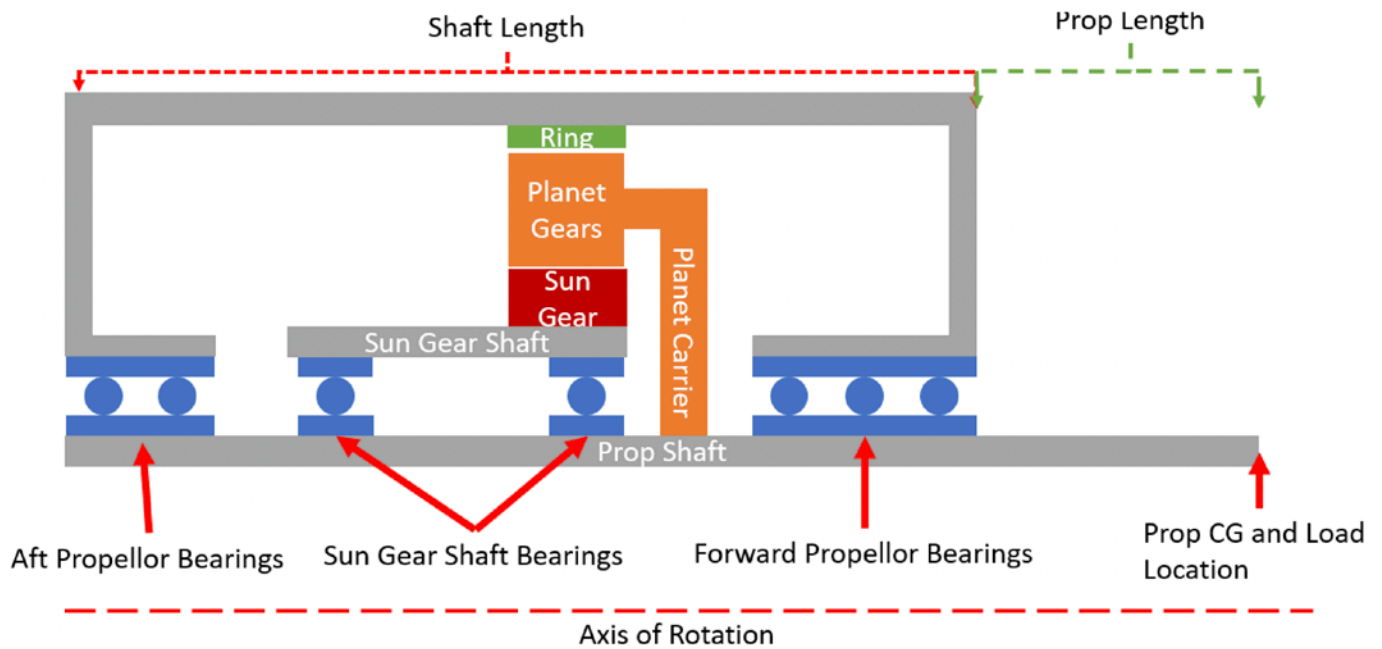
Assumed layout of gears and bearings for bearing load calculations.
